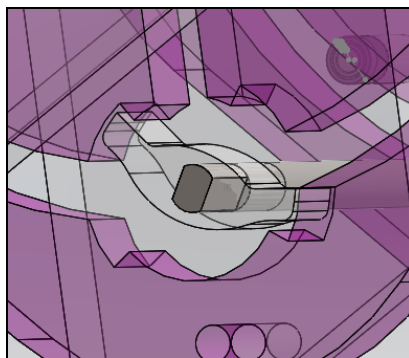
A key slot feature on our shaft and valve will permit not using a set screw and will permit the use of an adhesive to maintain structural integrity.
